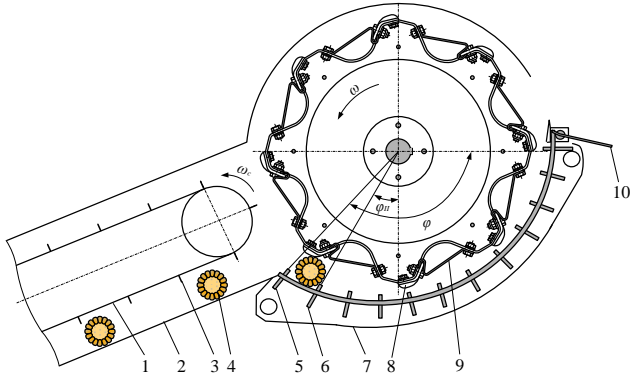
Corn ear threshing unit: 1 - feeder conveyor; 2 - feeder house bottom; 3 - slats; 4 - corn ear; 5, 6 - the first and second concave crossbars; 7 - concave; 8 - cylinder rasp bars; 9 - cylinder filler plates; 10 - rod grating; φ - concave wrapping angle ($\varphi = 130^\circ$); φ_{II} - angle of the second concave crossbar relative to the vertical ($\varphi_{II} = 30^\circ$); ω - angular velocity of the cylinder; ω_c - angular velocity of the feeder conveyor
